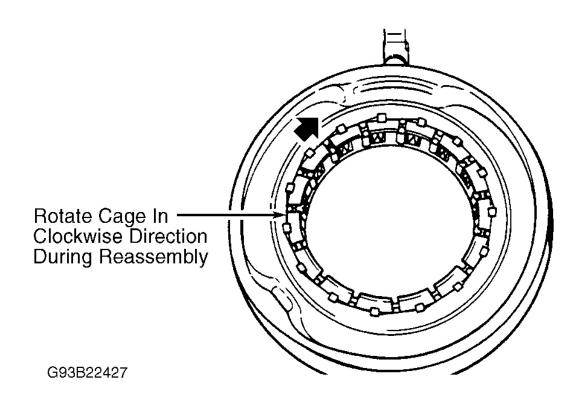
Rotate Cage Clockwise Until Stop Courtesy of AUDI OF AMERICA, INC.
